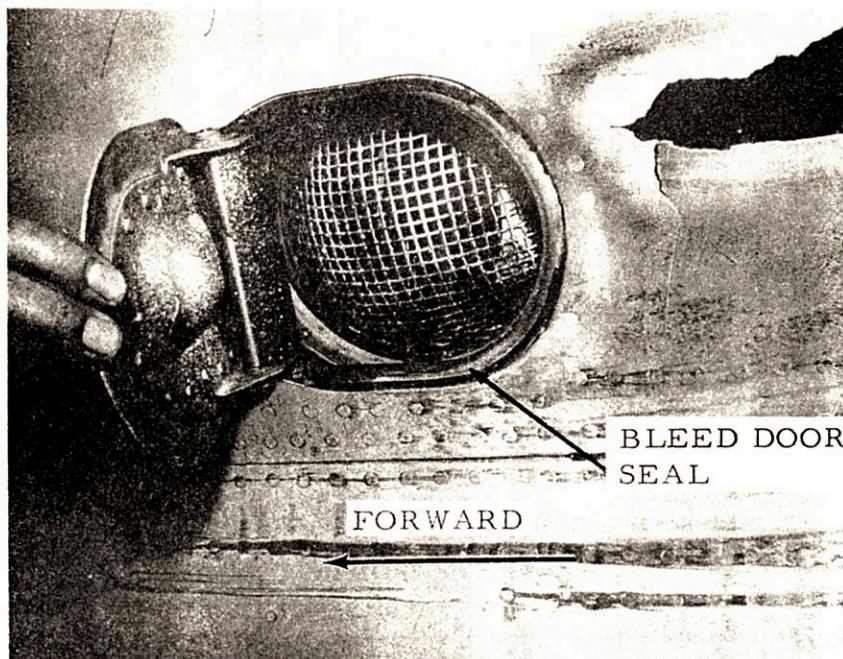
DAMAGED SURGE BLEED SEAL AND COWL DOOR, EXTERNAL VIEW
